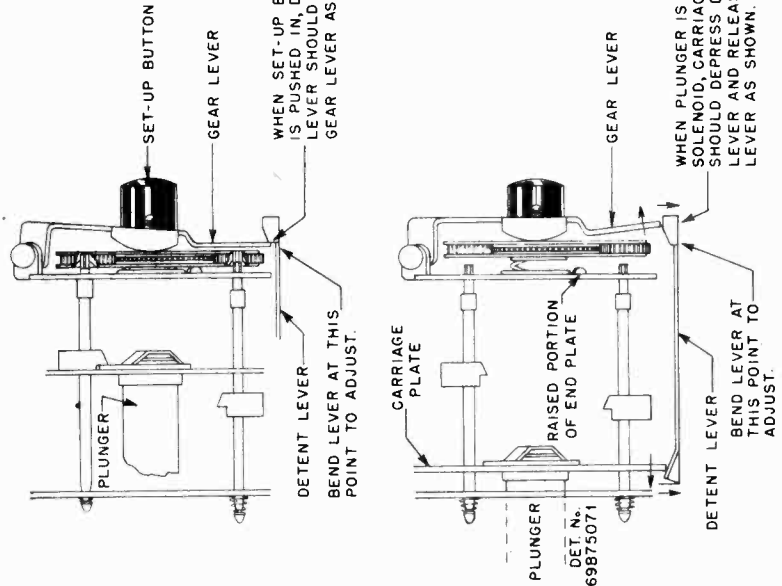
GEAR LEVER LATCH ADJUSTMENT
